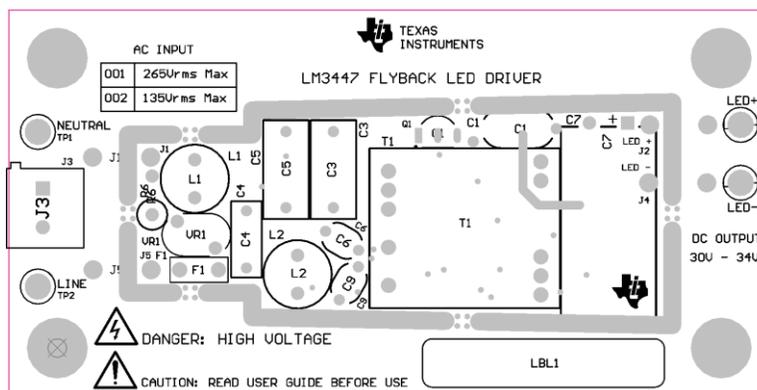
LM3447-PAR-230VEVM Top Assembly Drawing (top view)
